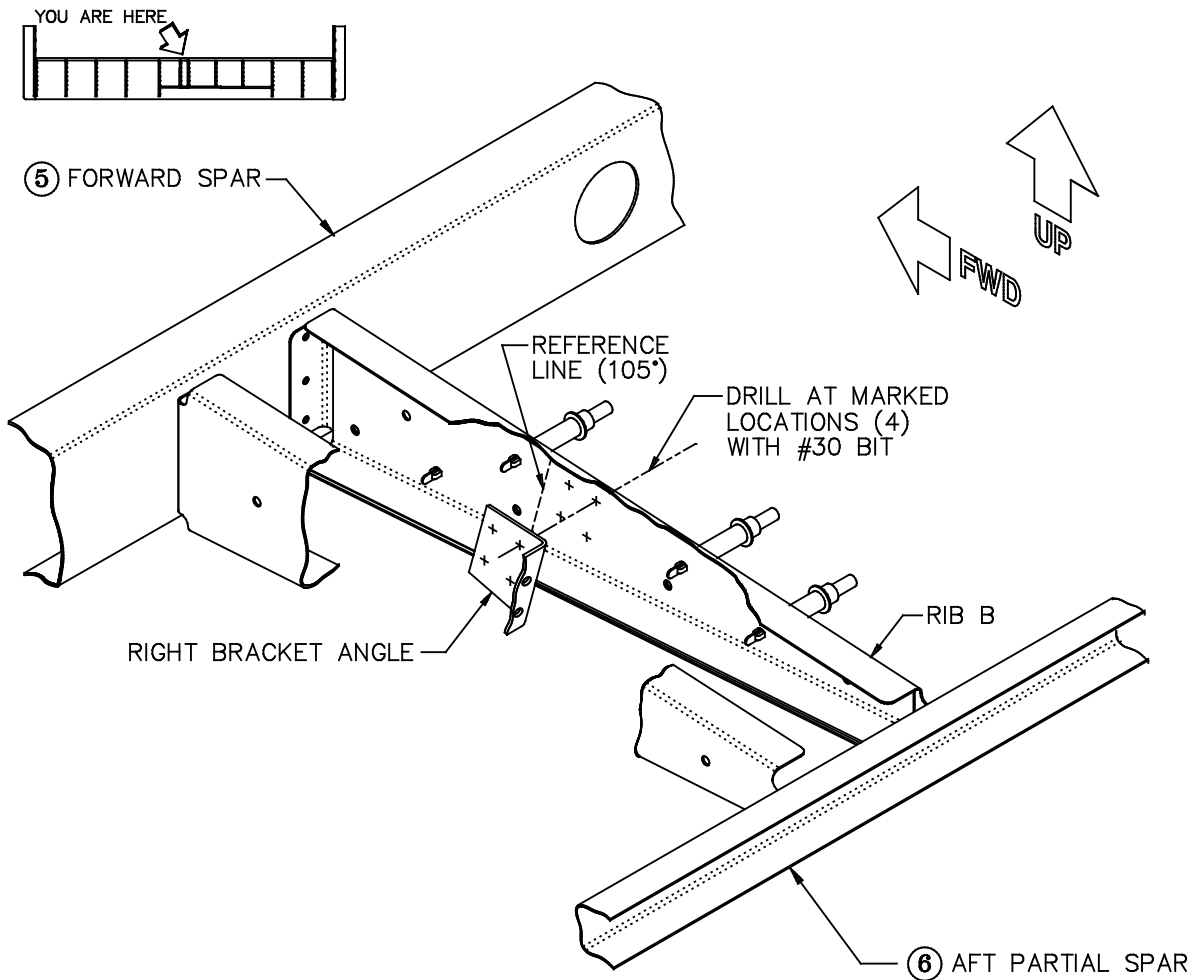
Positioning and Drilling the Right Trim Cable Bracket Angle
